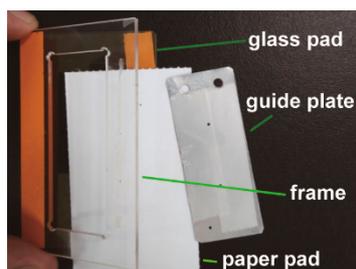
A template for drilling holes on coverslips. The frame was prepared by cutting out a rectangle (24×60 mm) from the center of a PMMA ($4.8 \times 7.8 \times 2$ mm) plate. The glass pad ($4.8 \times 7.8 \times 3$ mm) could be replaced with a PMMA plate. A guide plate was made by drilling holes on a rectangle aluminum strip ($24 \times 60 \times 0.3$ mm). A paper sticky tape (orange color) was used to hold the glass pad and the frame together. The aluminum strip can be replaced with a piece of transparency film.
